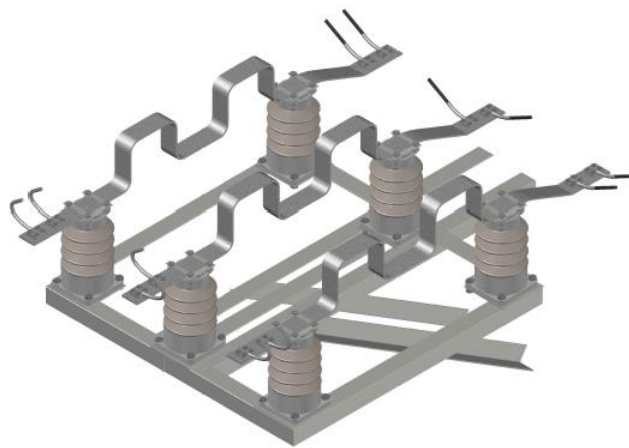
device for connecting a high-temperature ASHT wire and a cable line.
